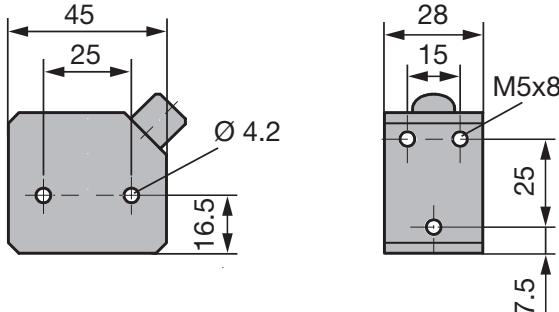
Installation dimensions of BTL5-P-4500-1 magnet
